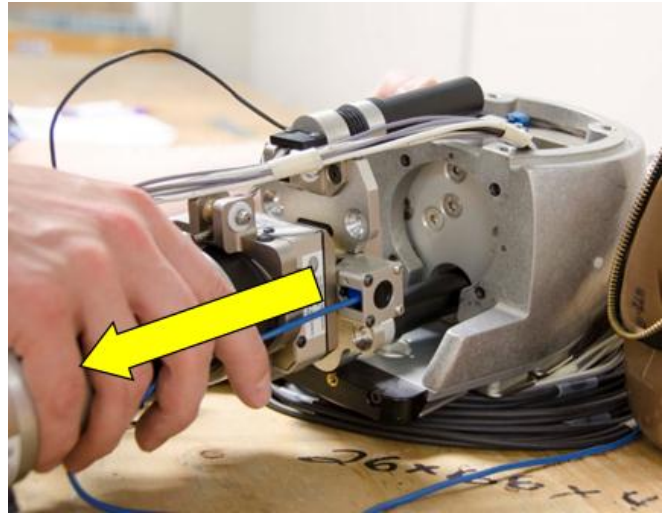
Motion necessary to separate the neck assembly from the skull assembly.
